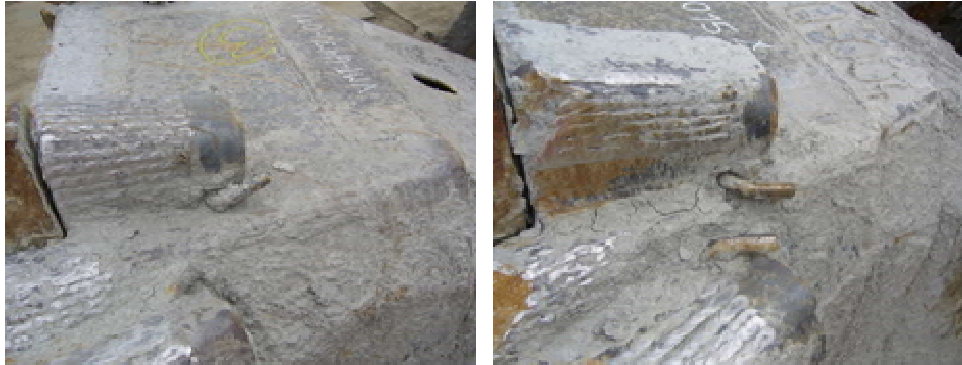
Wrong positioning of the tooth adapters on the renewed buckets
